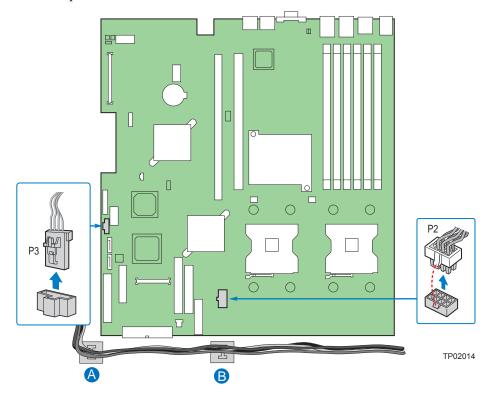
Connecting P2 and P3 Power Supply Cables to Server Board
